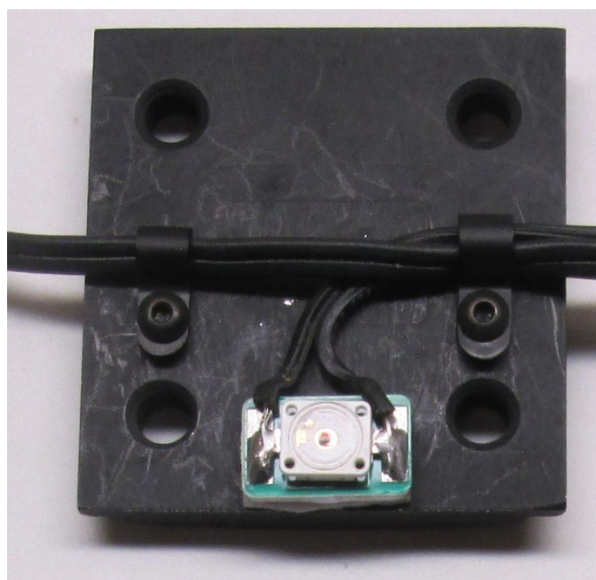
Thoracic 1 inner rib clamp plate with LED and wire clamps installed
